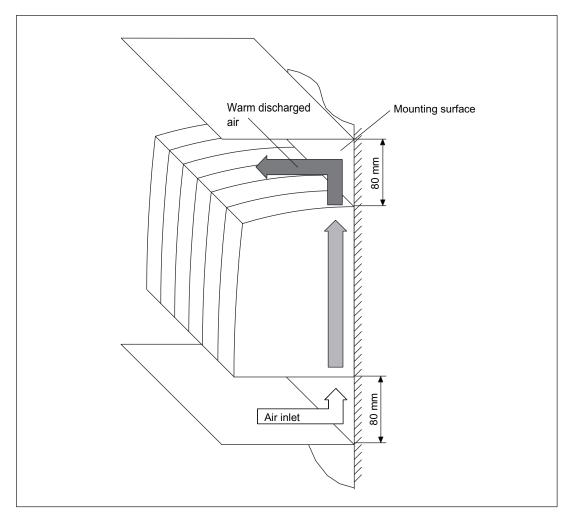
Clearances for booksize drive line-up with internal air cooling
